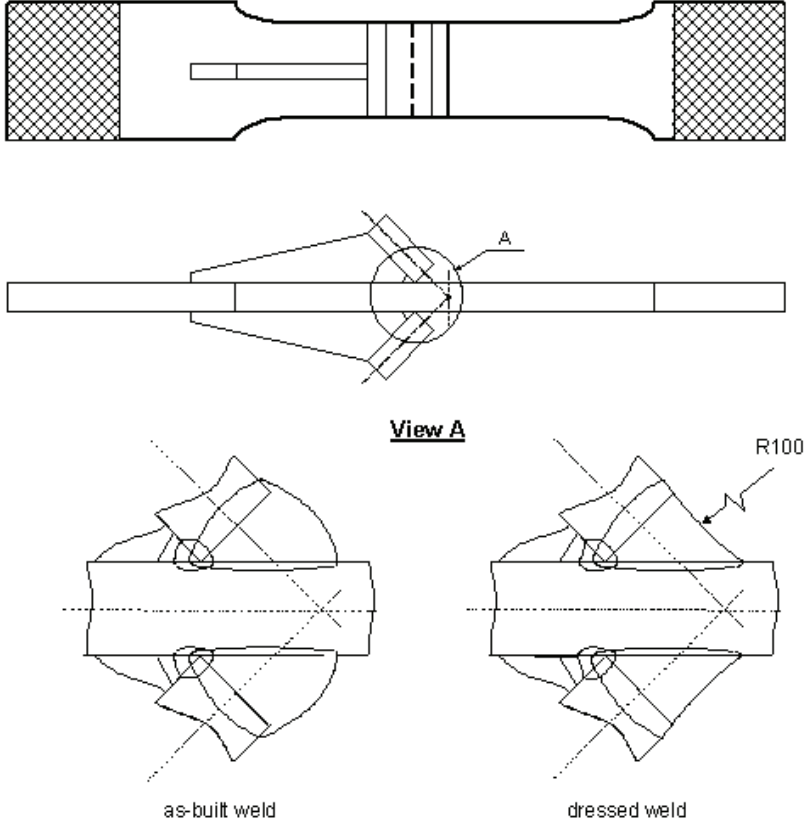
Specimen with inclined attachment in as-welded and dressed conditions
